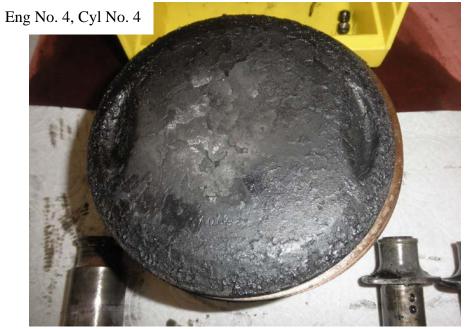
Close up view of the No. 4 piston's head showing the dark gray color.
